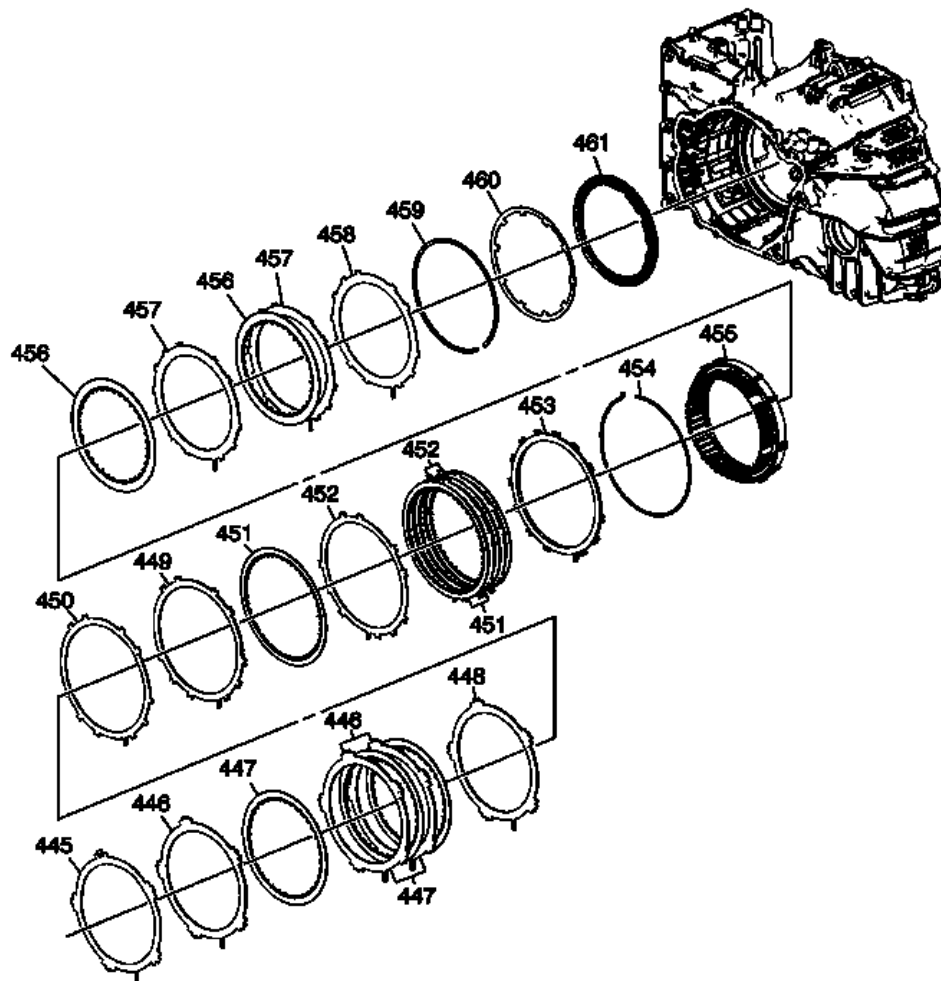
2-6, Low & Reverse & 1-2-3-4 Clutch Plate Assemblies
